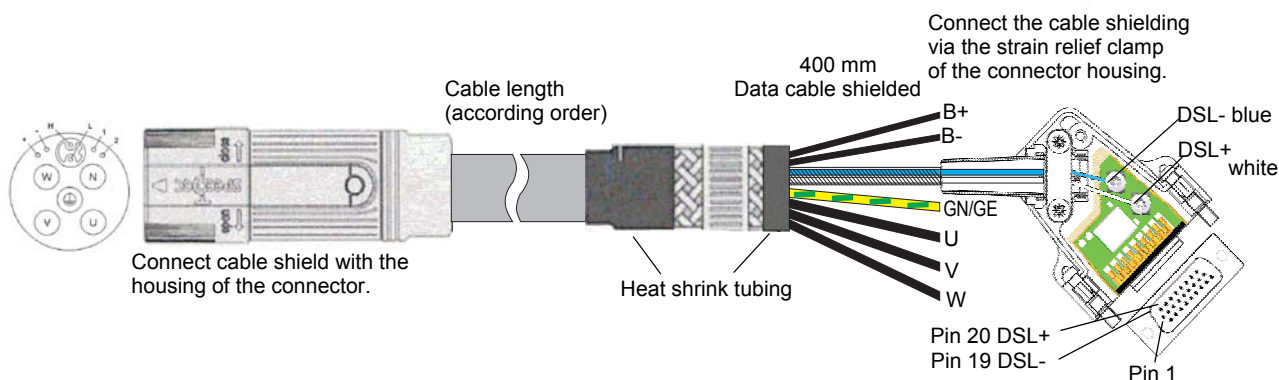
Motor cable with HIPERFACE DSL[®] 21 A
